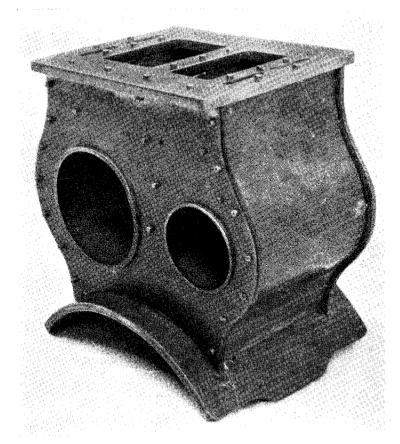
Cylinder assembly removed from block, with back-plate
